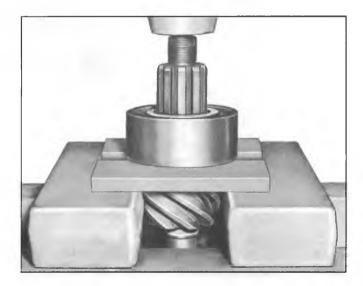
F-Drive Pinion Front Bearing Removal (11,000 Lb. Axle)
